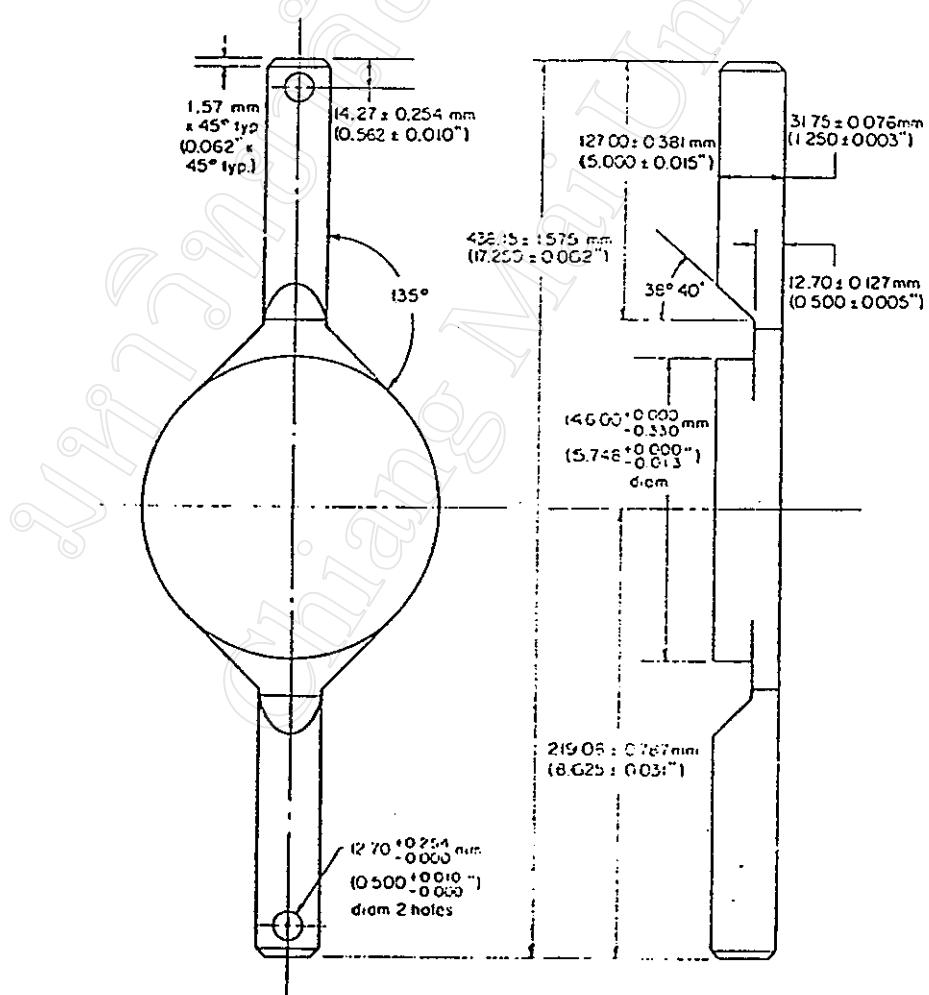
Split-Disk Tensile Test Fixture for Parallel Fiber Reinforced Ring Specimens
